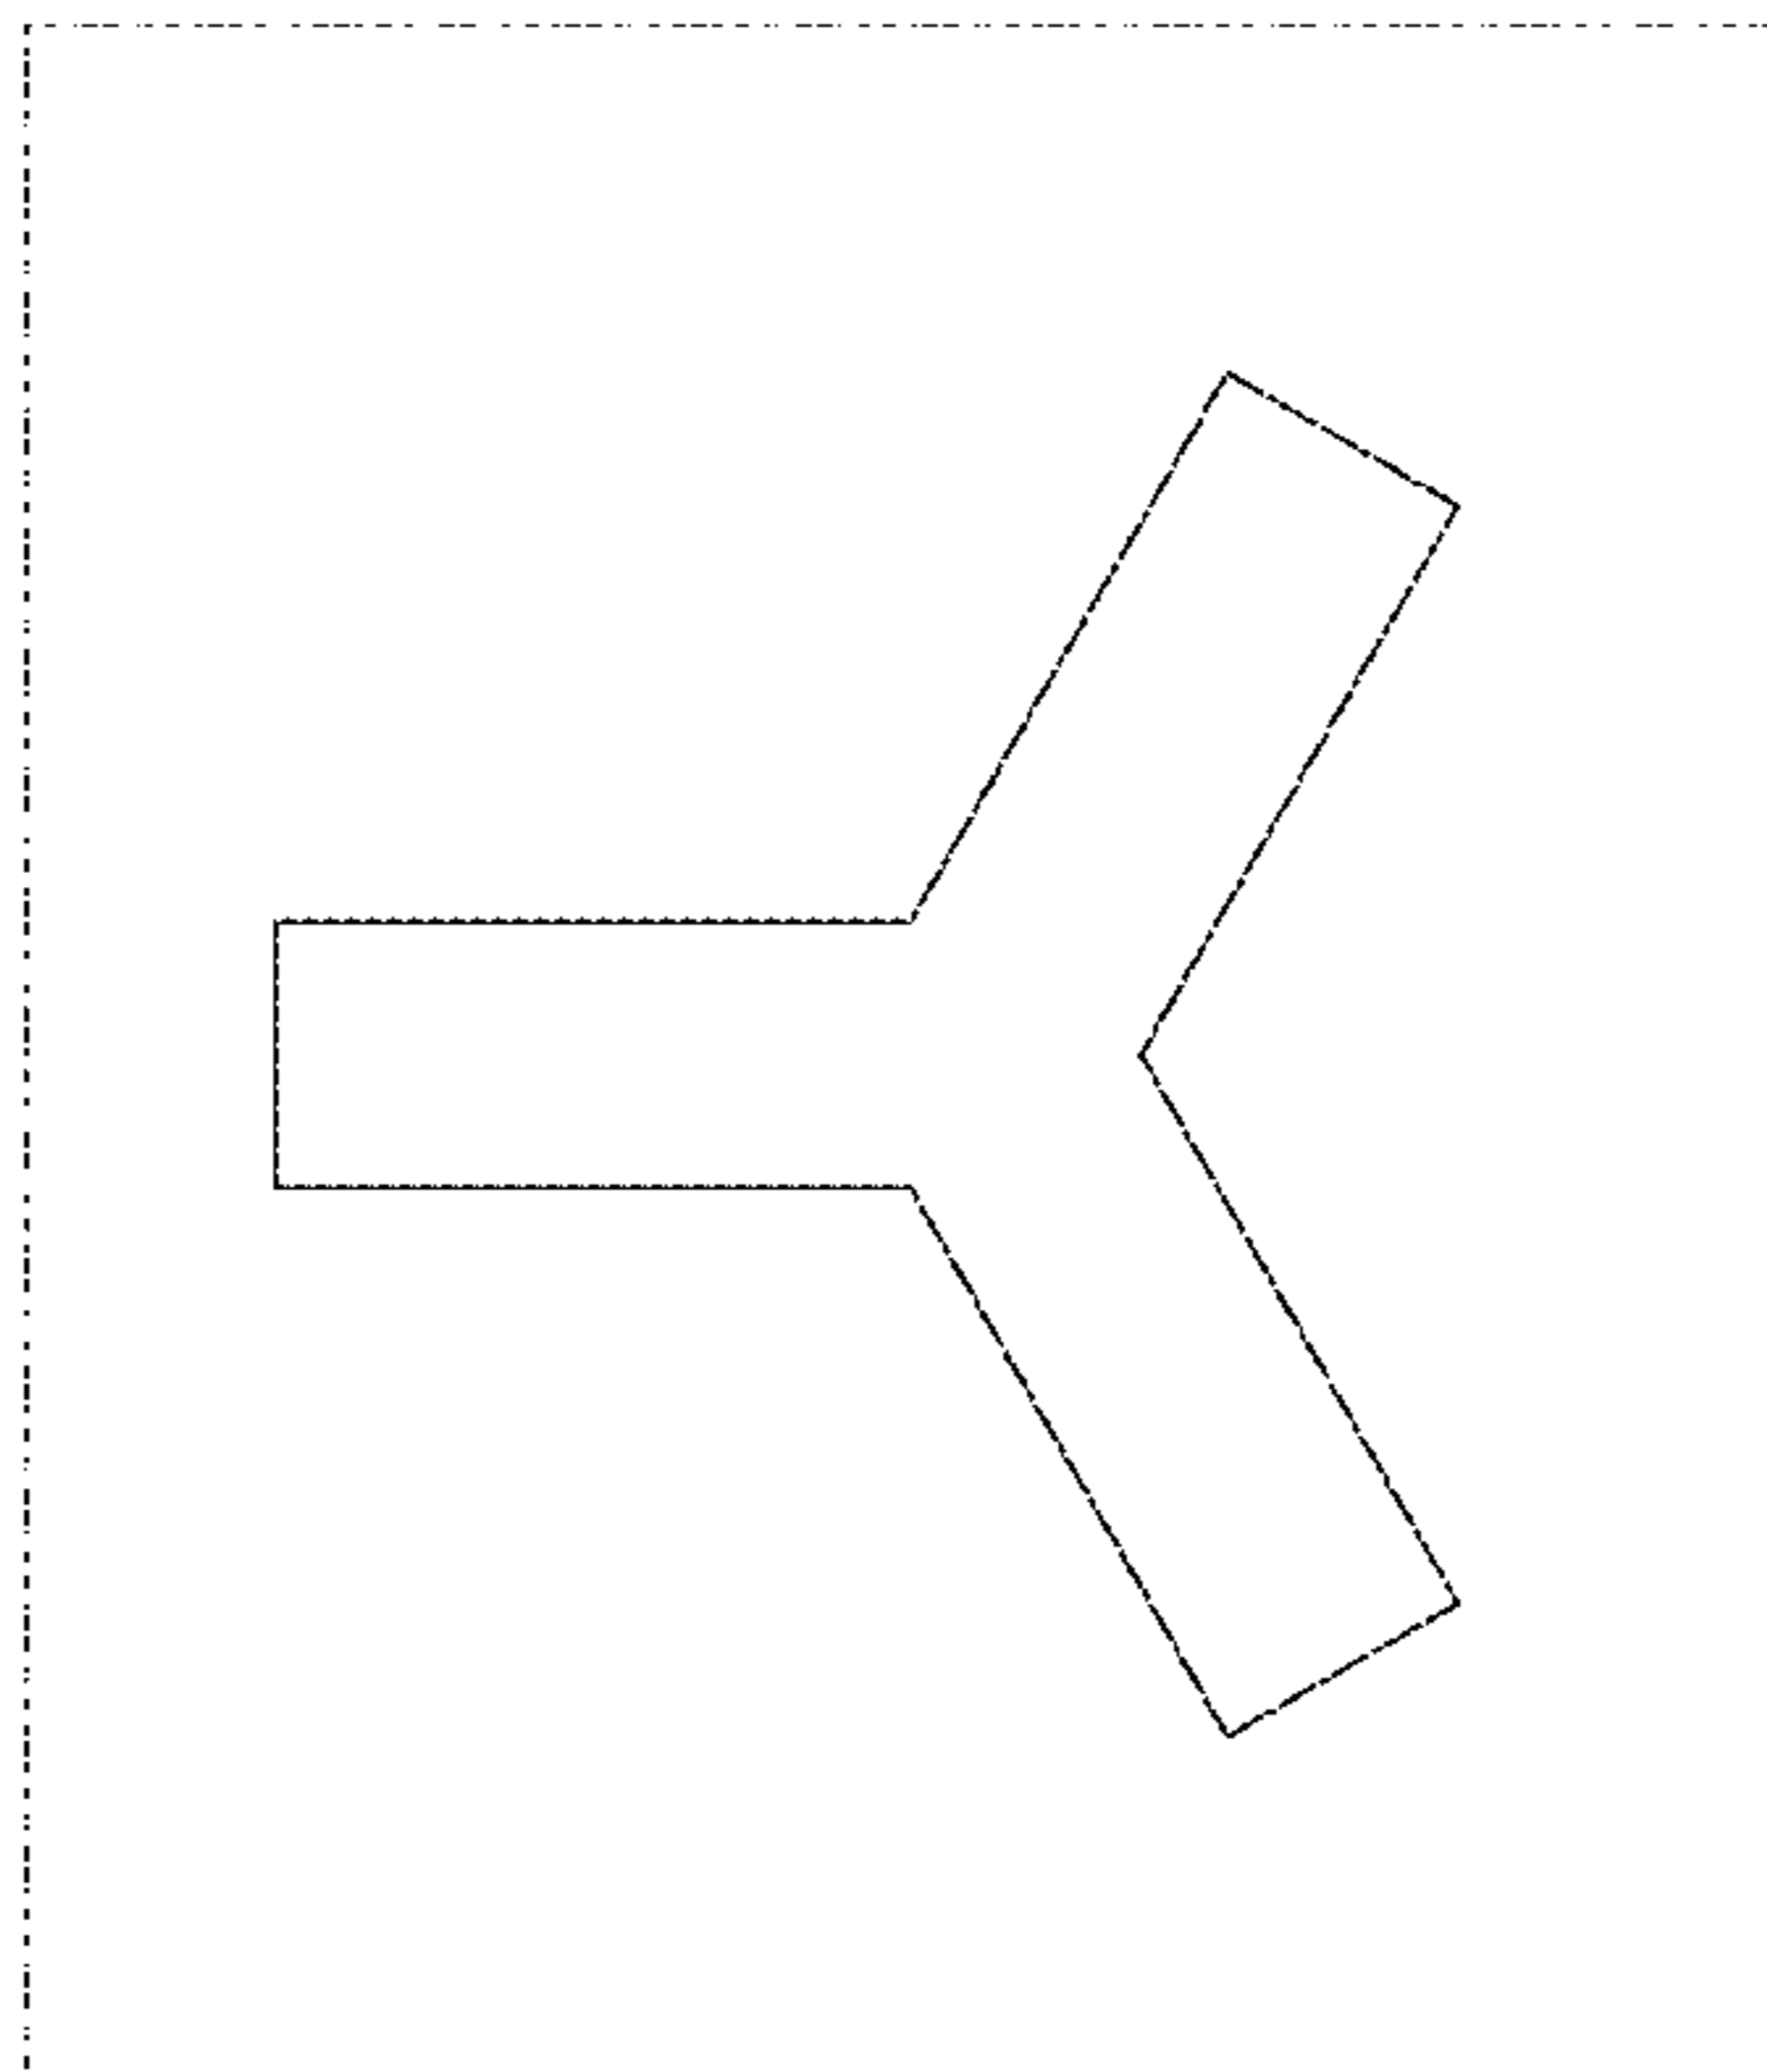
is a top plan view of my new design for a solder pad. FIG. 2 is a top plan view of the solder pad of FIG. 1 with illustrative radial axes drawn. FIG. 3 is a top plan view of the solder pad of FIG. 1 with illustrative adjacent circuit board traces and vias. FIG. 4 is a perspective view of the solder pad of FIG. 1 on an illustrative integrated circuit package; and, FIG. 5 is a perspective view of the solder pad of FIG. 1 on an illustrative circuit board. Broken line illustrations of environmental structure in the drawings, including the radial axes in FIG. 2, circuit board traces and vias in FIG. 3, integrated circuit package outlines in FIG. 4, and circuit board outlines in FIG. 5, are provided for illustrative purposes only and form no part of the claimed design.
